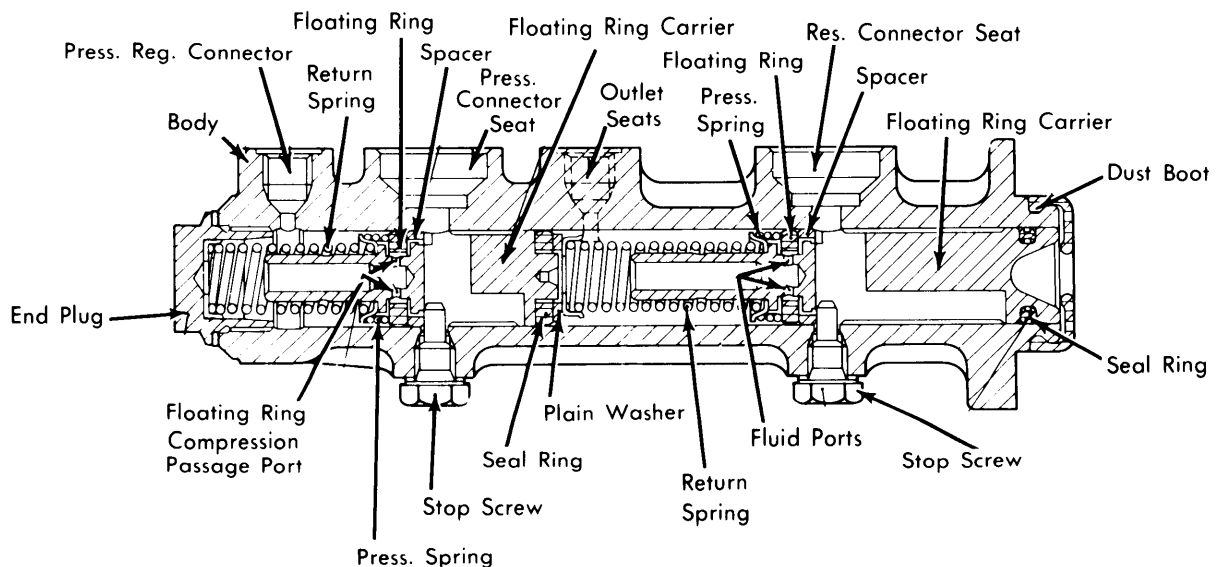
Sectional View of Master Cylinder Assembly (128 Models)
